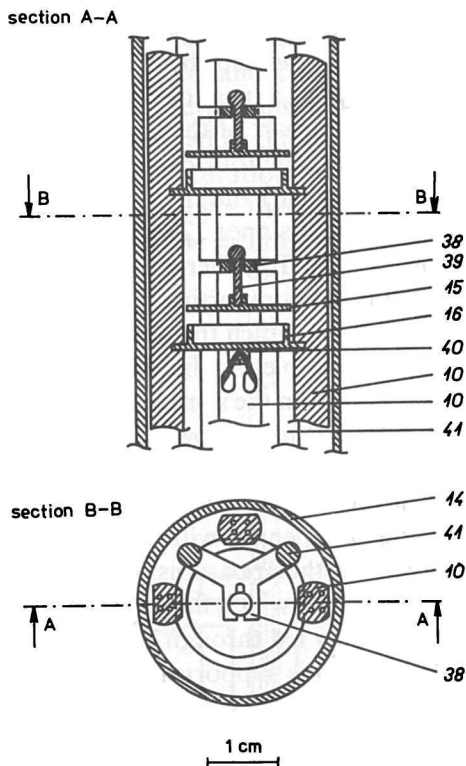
Detail drawing of the carriers of samples placed in their supporting frame.
